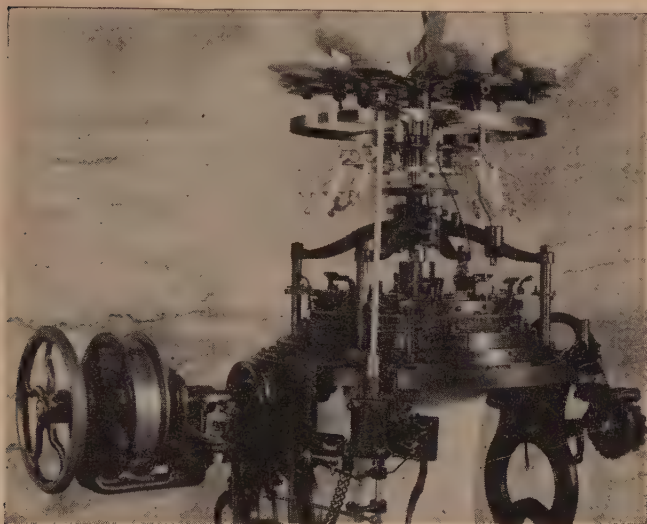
View of Scott & Williams body machine equipped with Crawford electric stop motion.
